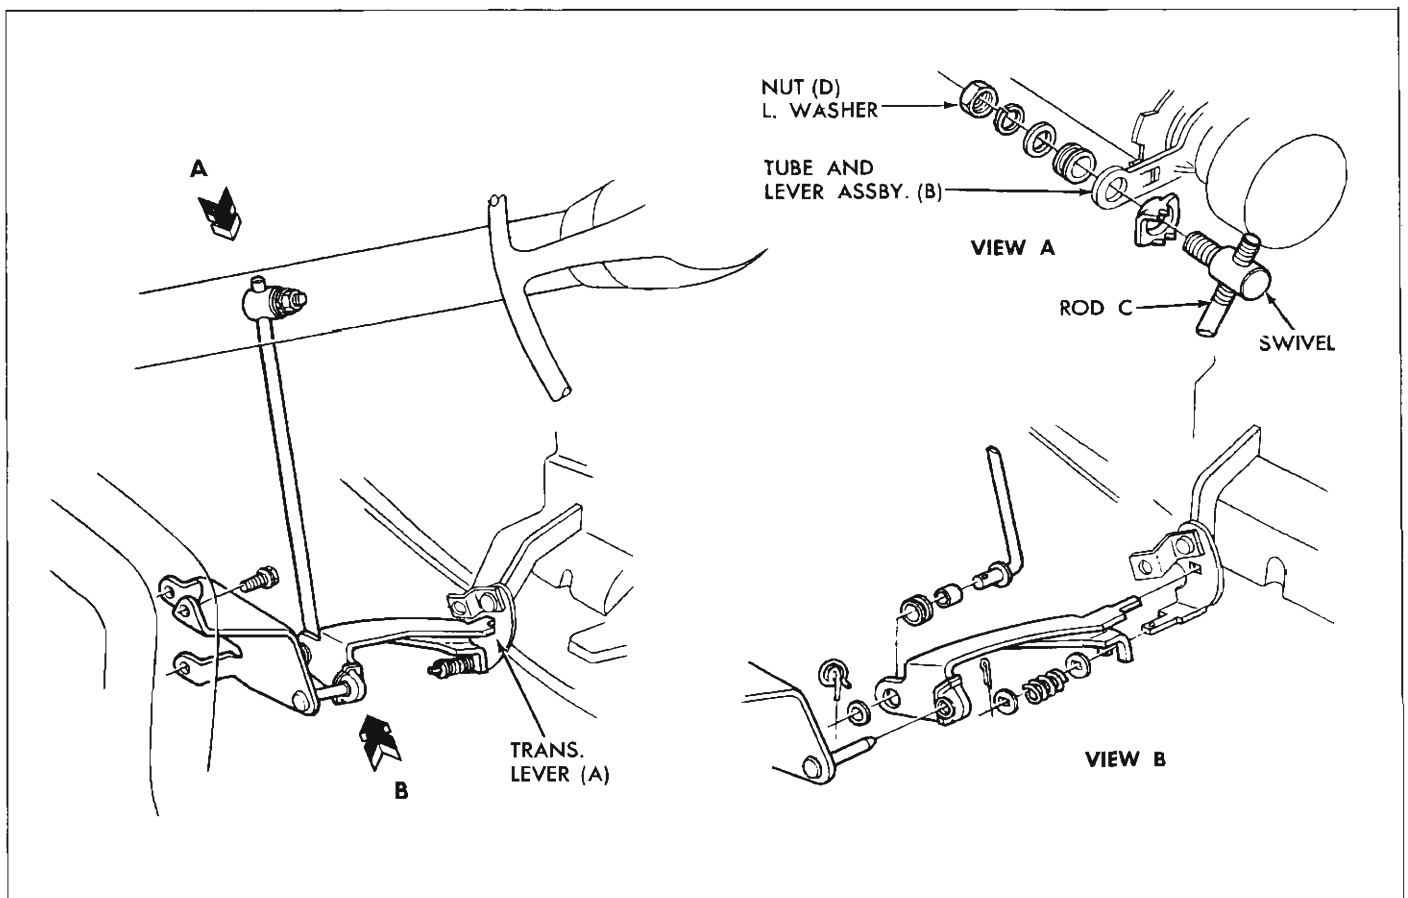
PG—Chevrolet Shift Linkage Adjustments
